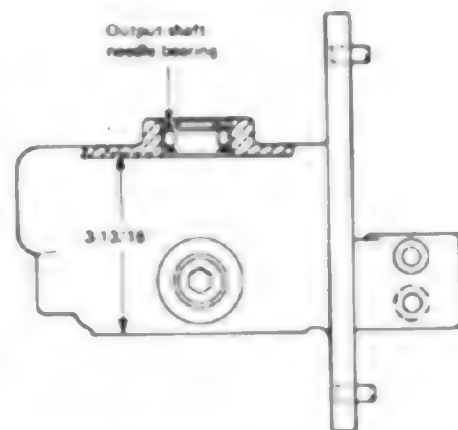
Output shaft bearing is pressed in housing to the dimensions shown.
